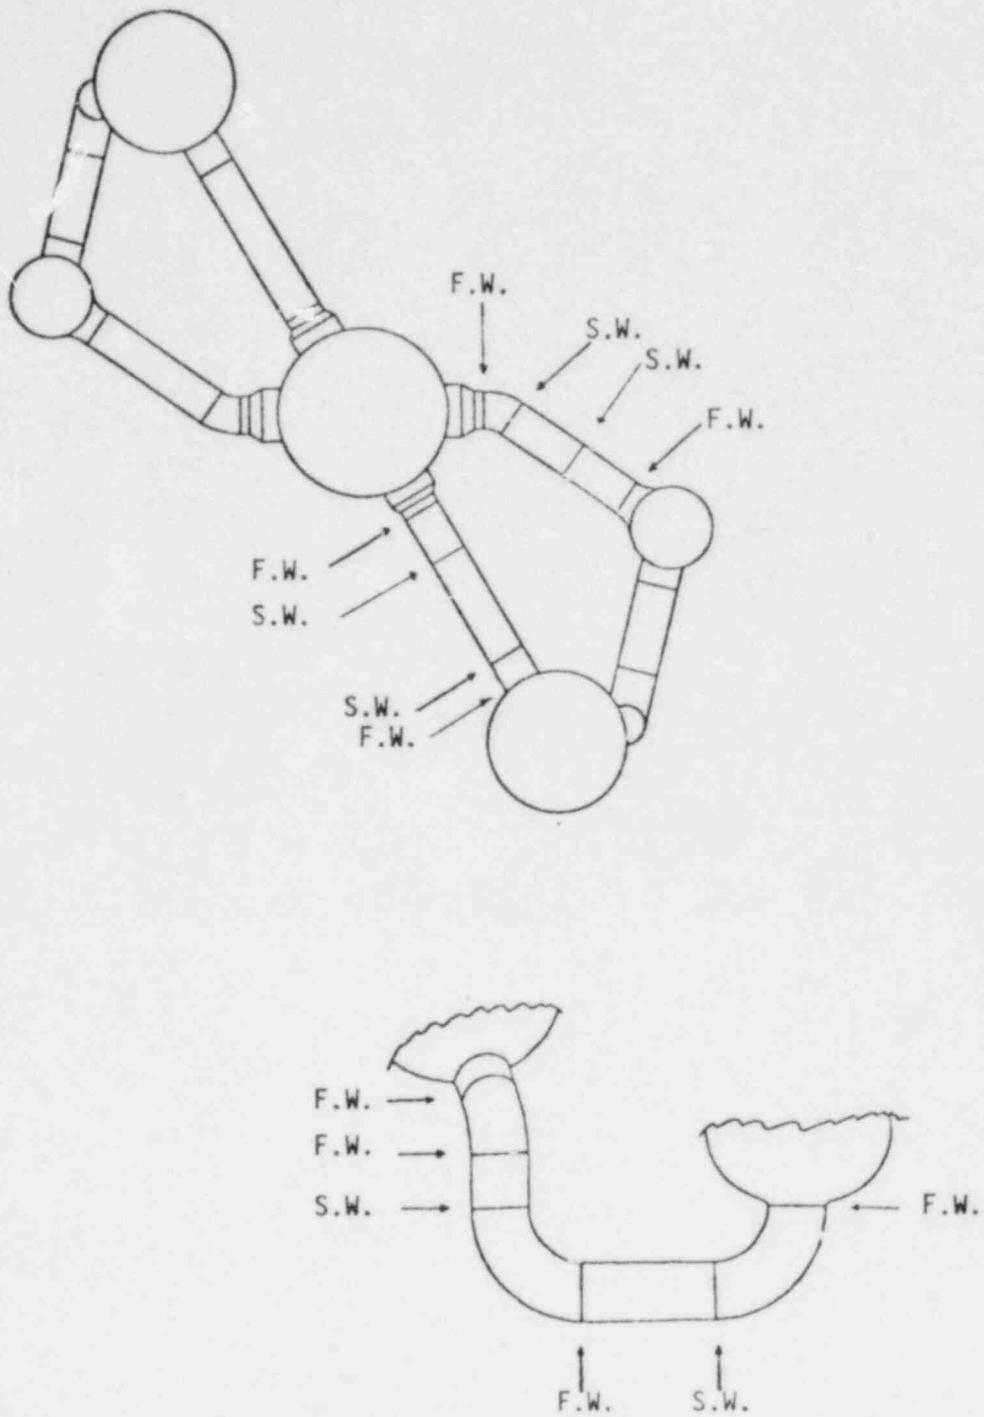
Weld location for Point Beach Units 1 and 2
